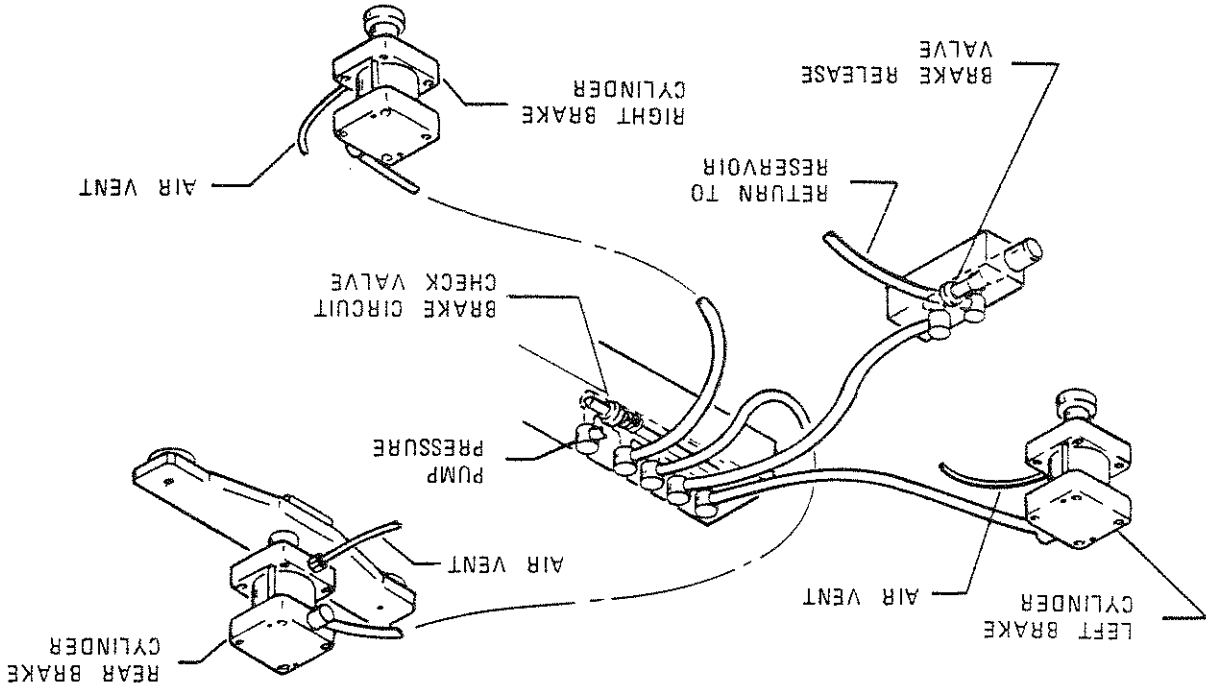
1200/5000 Series Side Move Base Brake Circuit
